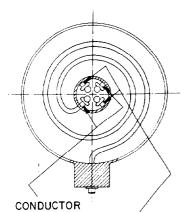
The four-spiral assembly ready to be placed in the tank.
